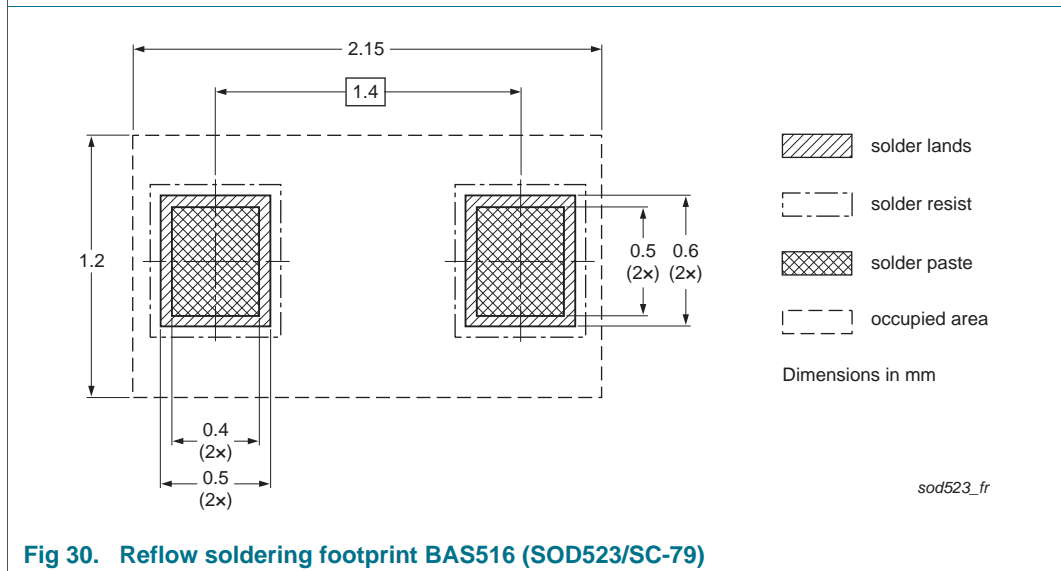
Reflow soldering footprint BAS516 (SOD523/SC-79)
